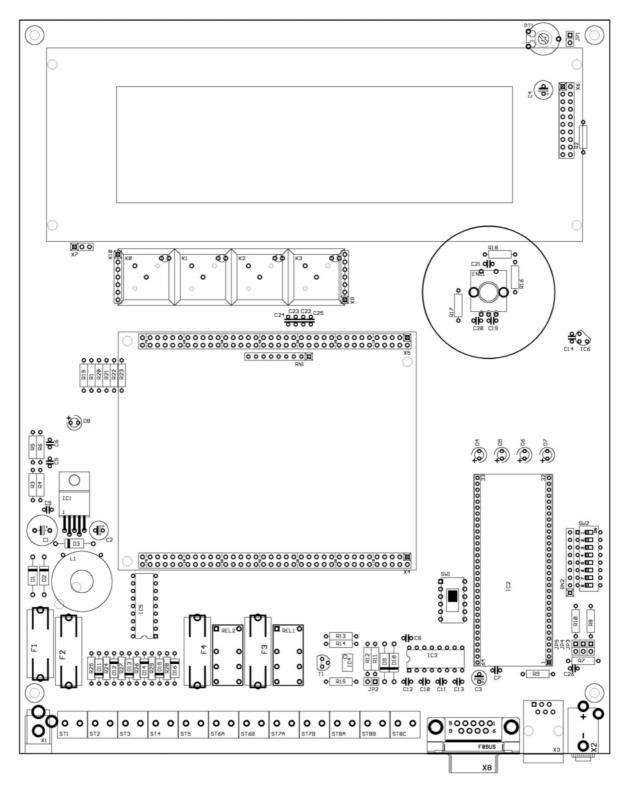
Parts Location Diagram of the ACPRD Carrier Board
